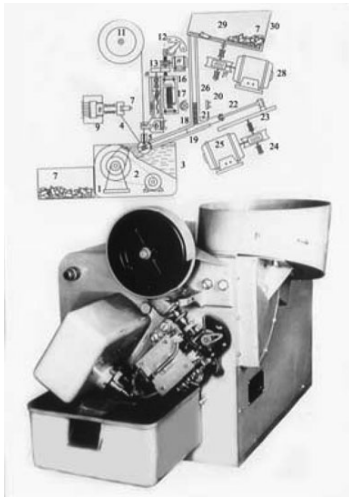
LKZ-34 electrospark special-purpose installation for machining of mass-produced workpieces (with one standard size).
